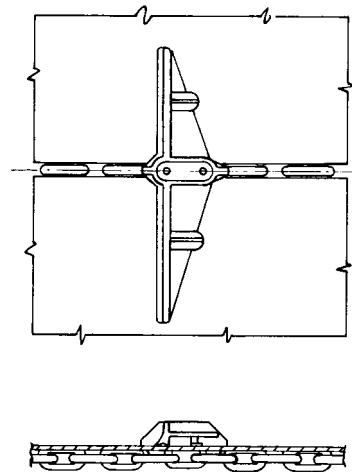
Scraper flight with welded chain.
